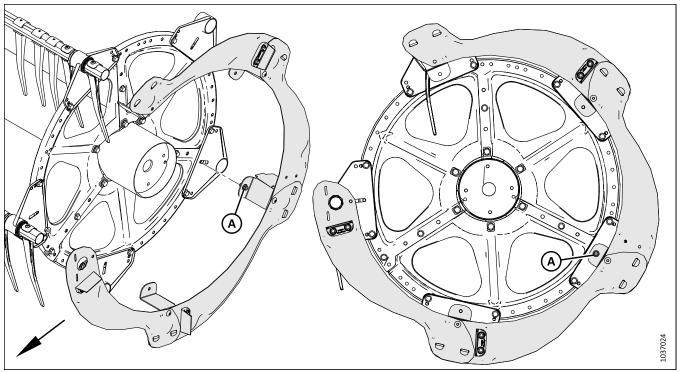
Five-Bat Reel – Partially Assembled Reel Endshields on Reel
